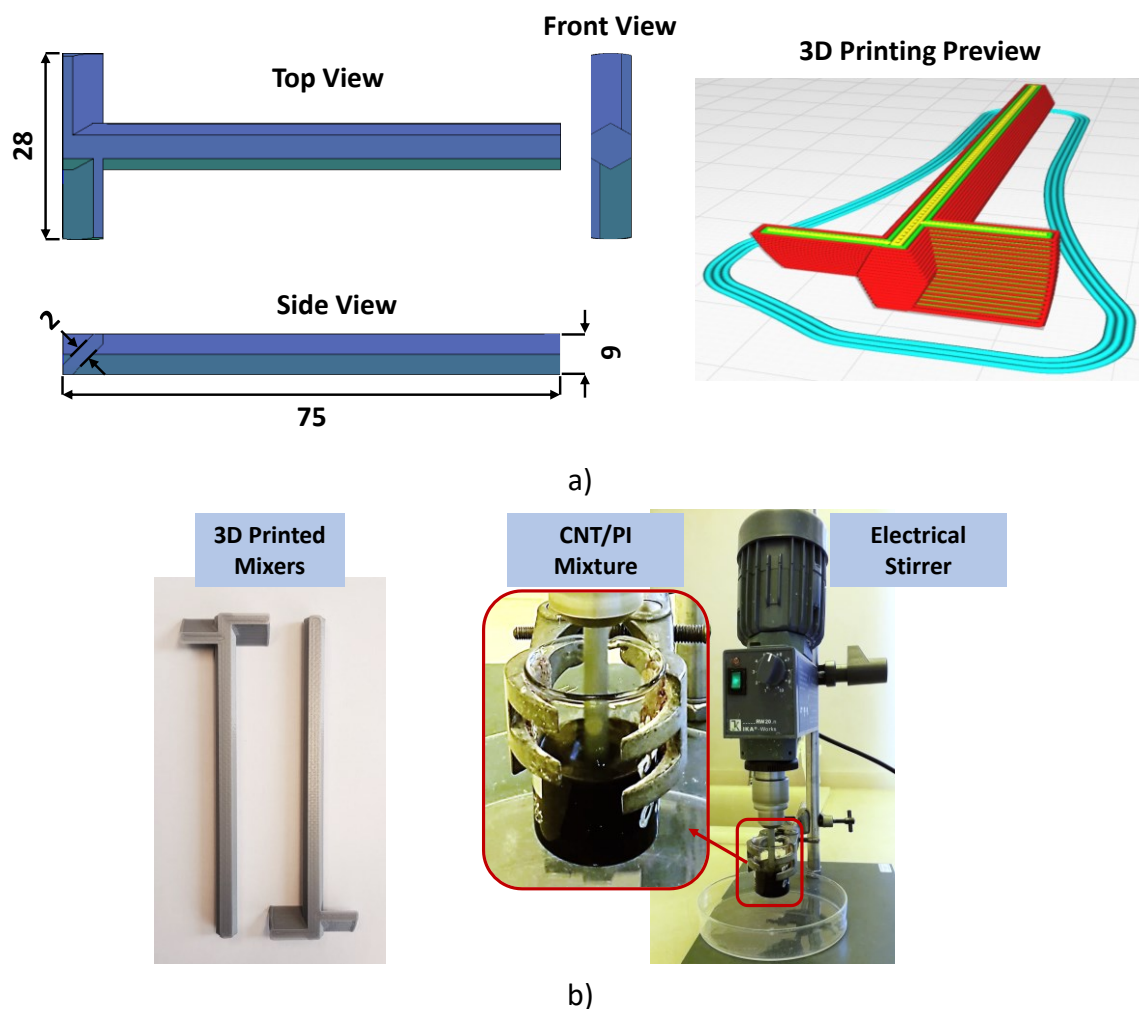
Mixer for CNT/PI. a) Design of the tool. b) Fabricated mixer and mixing test.
